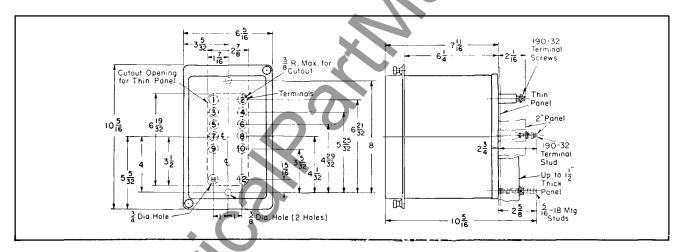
Types CB-FP, CB-2FP, CB-7FP, CB-8FP, Projection Mounting.
